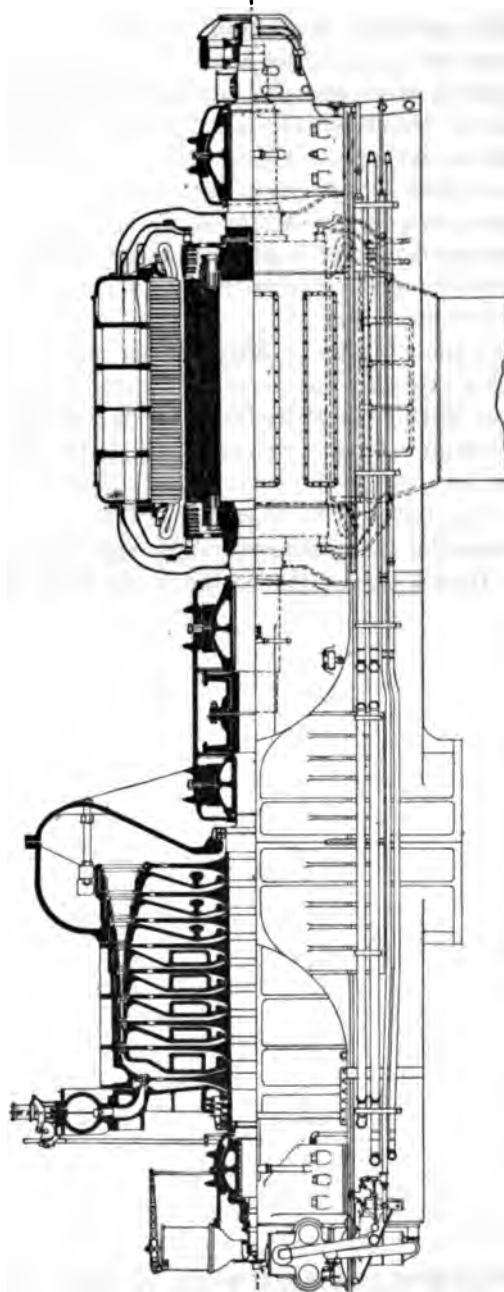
SECTIONAL VIEW OF ONE OF THE 25,000 K.V.A. TURBO-GENERATOR UNITS
